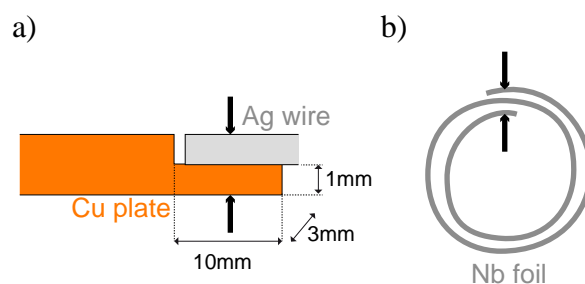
Welding sketch. The black arrows show where/how the electrodes should be in contact with the work pieces. a) The silver wires should be welded in the centre of the stub. Further out, the copper melts too much, further inside, the heat drains into the bulk. b) Cross-section of the Nb shield. The Nb foil was double-rolled as shown and three layers were welded.
